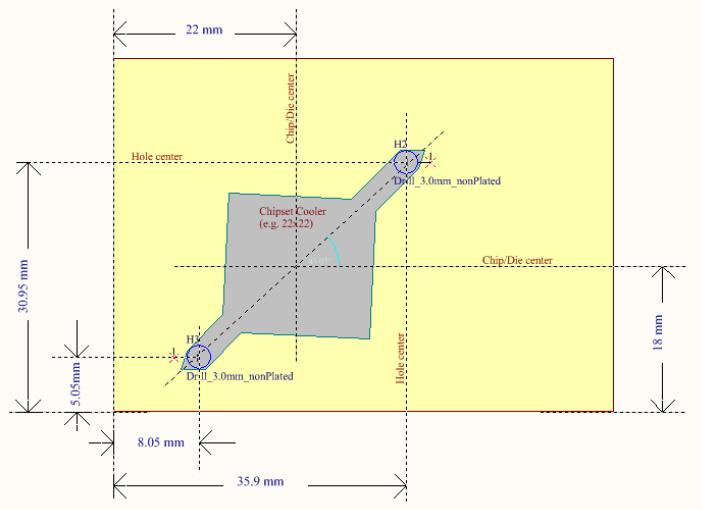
Mechanical properties of the COM (heatsink mounting points)
